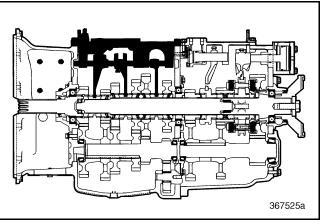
Main Case Shift Cover Locator (T313L/T318L Shown)
